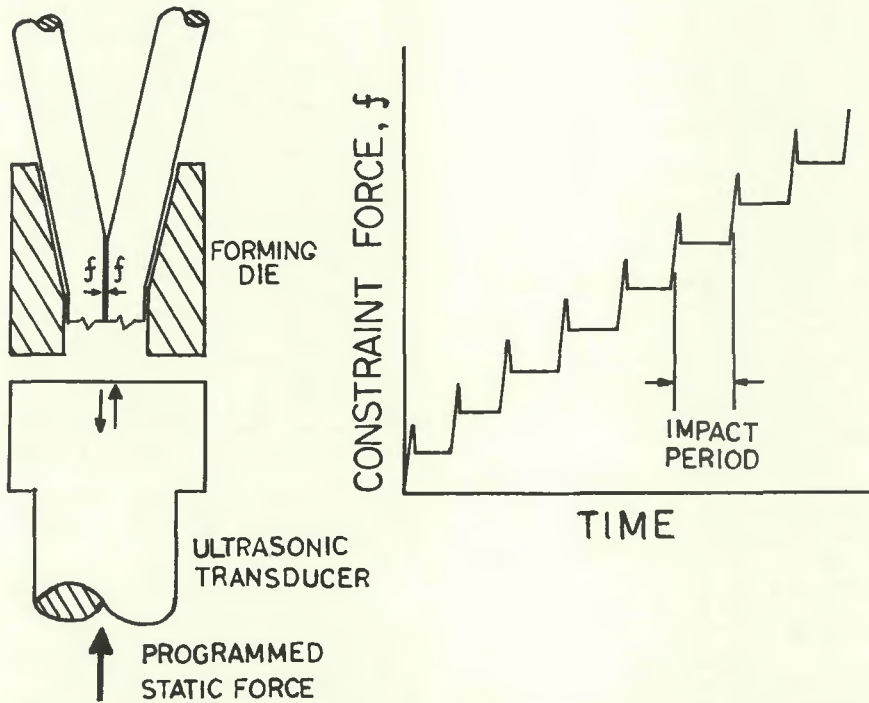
Position of wires in forming die with chart showing incremental buildup of constraint forces during welding cycle
